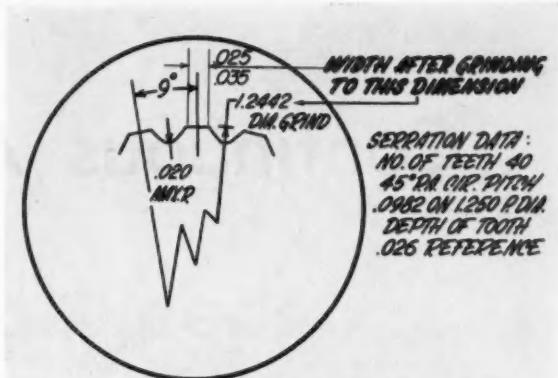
Axle shaft is machined by conventional method, but serrations are rolled in, after which shaft is hardened and ground to size, producing serrations of 0.025-0.035-in. width.
